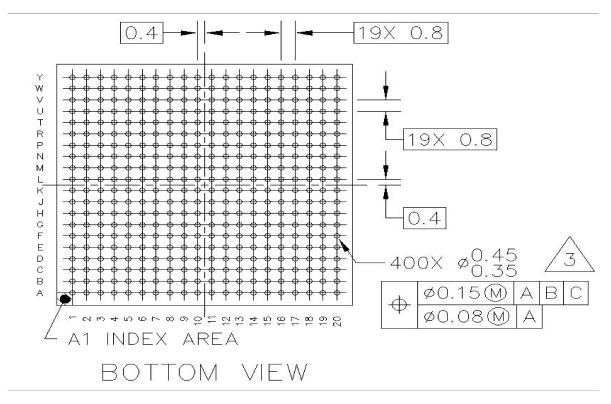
400 MAPBGA 17x17 mm Package Bottom View
